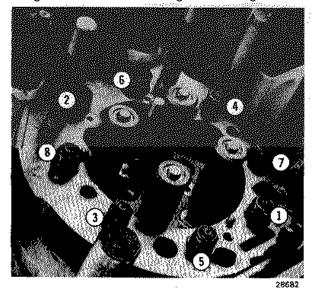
Head-To-Liner Nut Tightening Sequence
